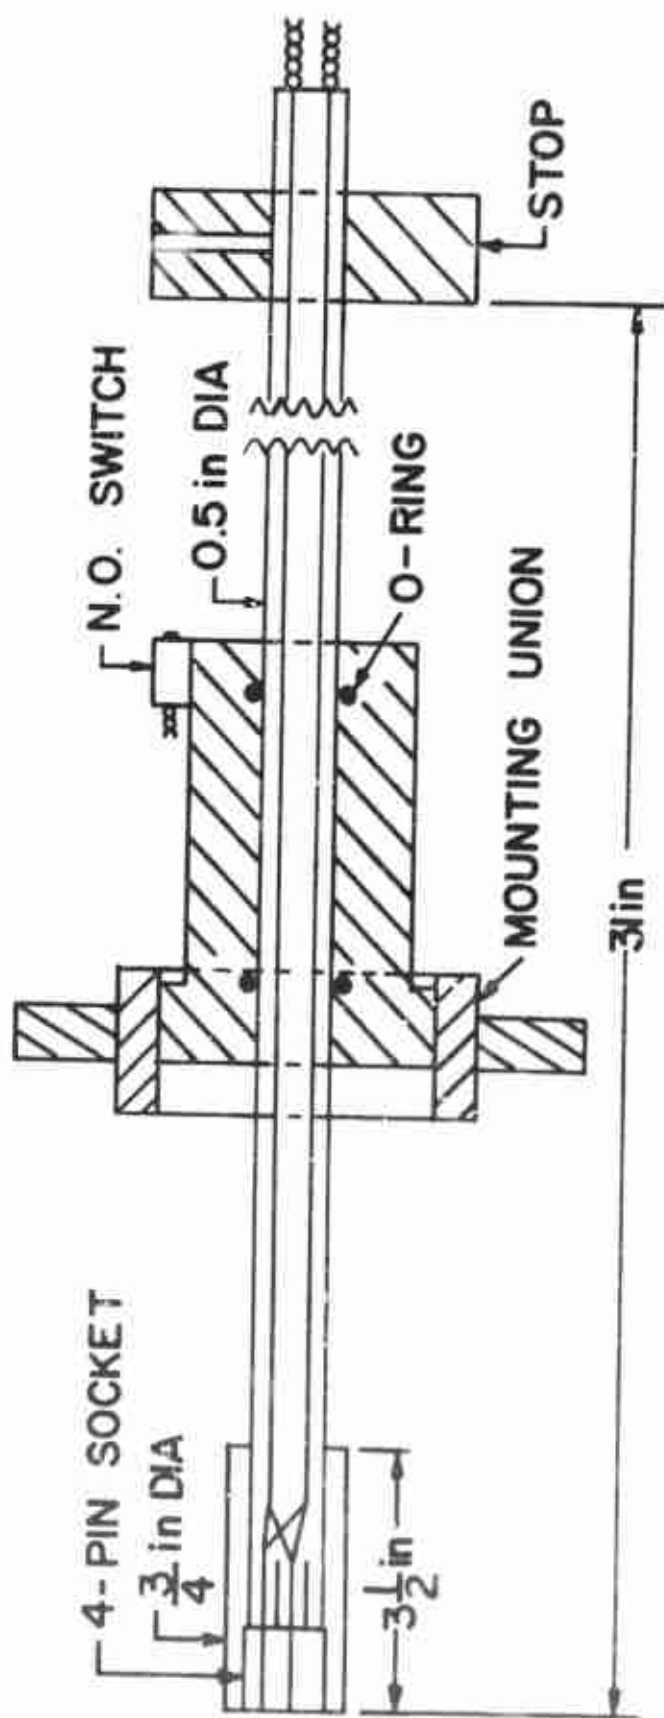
Sectional view through the center of sample injection rod and its accessories. The 4-prong socket is to receive the male plug on the sample holder. The injection rod can move freely along an O-ring sealed guide pipe. During experiment the whole assembly is connected to radiation furnace by the mounting union.
